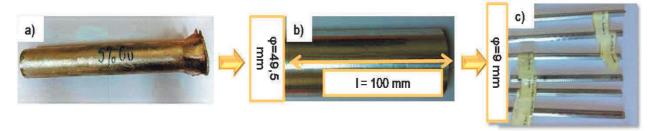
Example of experimental procedure: a) ingot, b) machined sample, c) rods after KoBo
